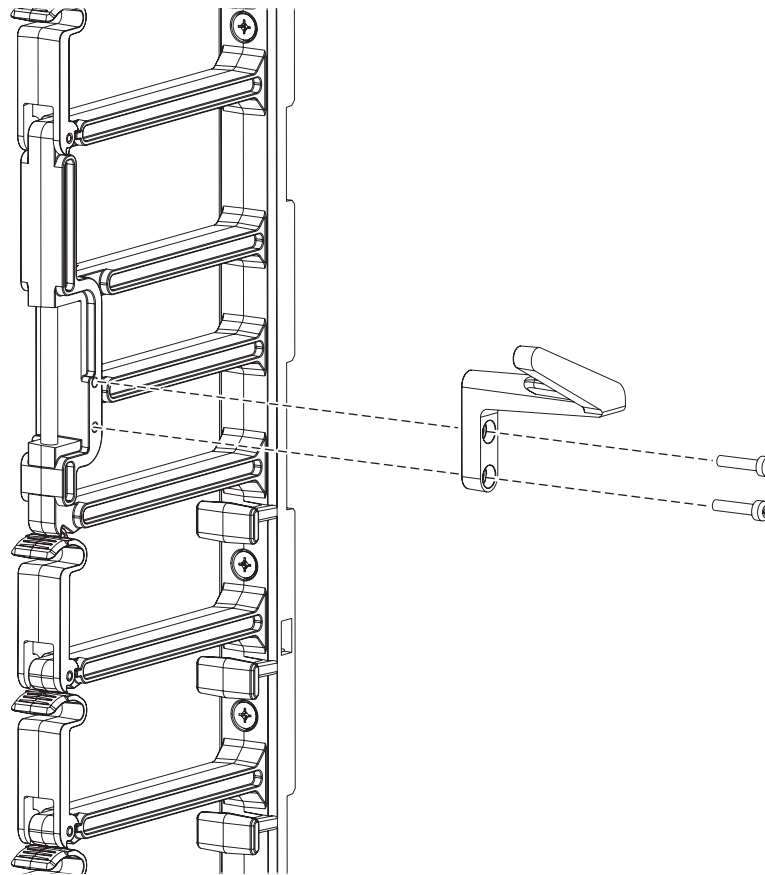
Removing the Bushings from the Right Cable Management Frame
